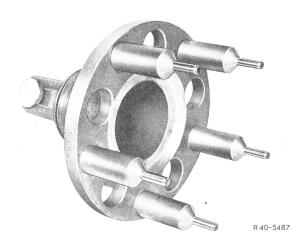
Holder for wheel reflecting mirror of rear wheels
